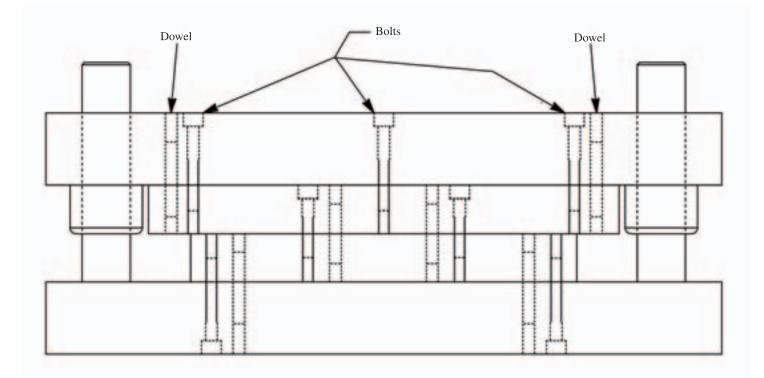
9 Mount Die Section on Upper Die Set With the die section mounted on the die set, and the punch holder mounted on the hardened blank, the cold roll punch holder is screwed and bolted and reamed in place. Now when the die is wire EDMed, there will be a perfect alignment between the punch and die sections.
